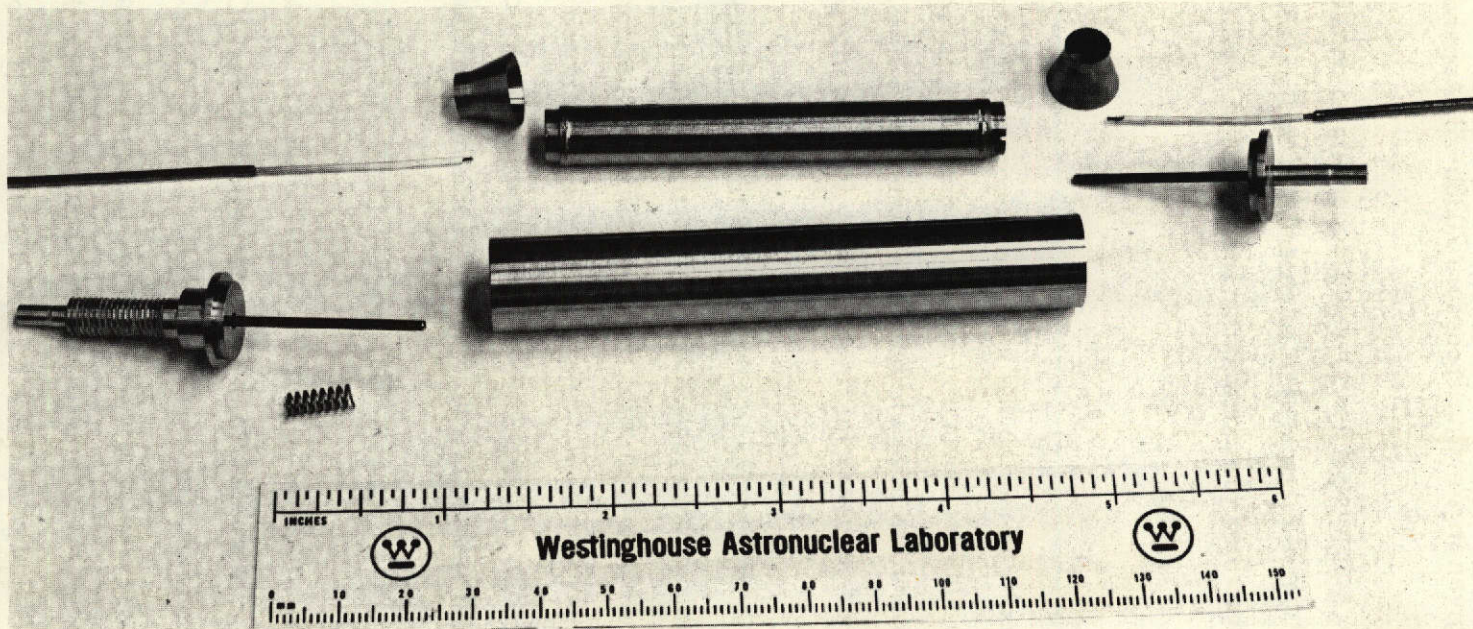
D/2 Size Fuel Pin and Capsule Ready for Final Assembly
